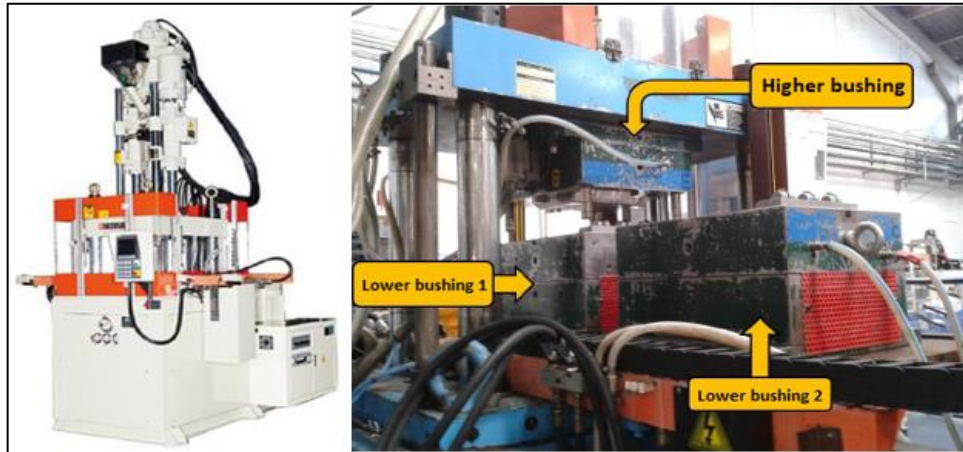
Type of injection machine used for comfort systems manufacture (left) and constitution of the molds used (right)
